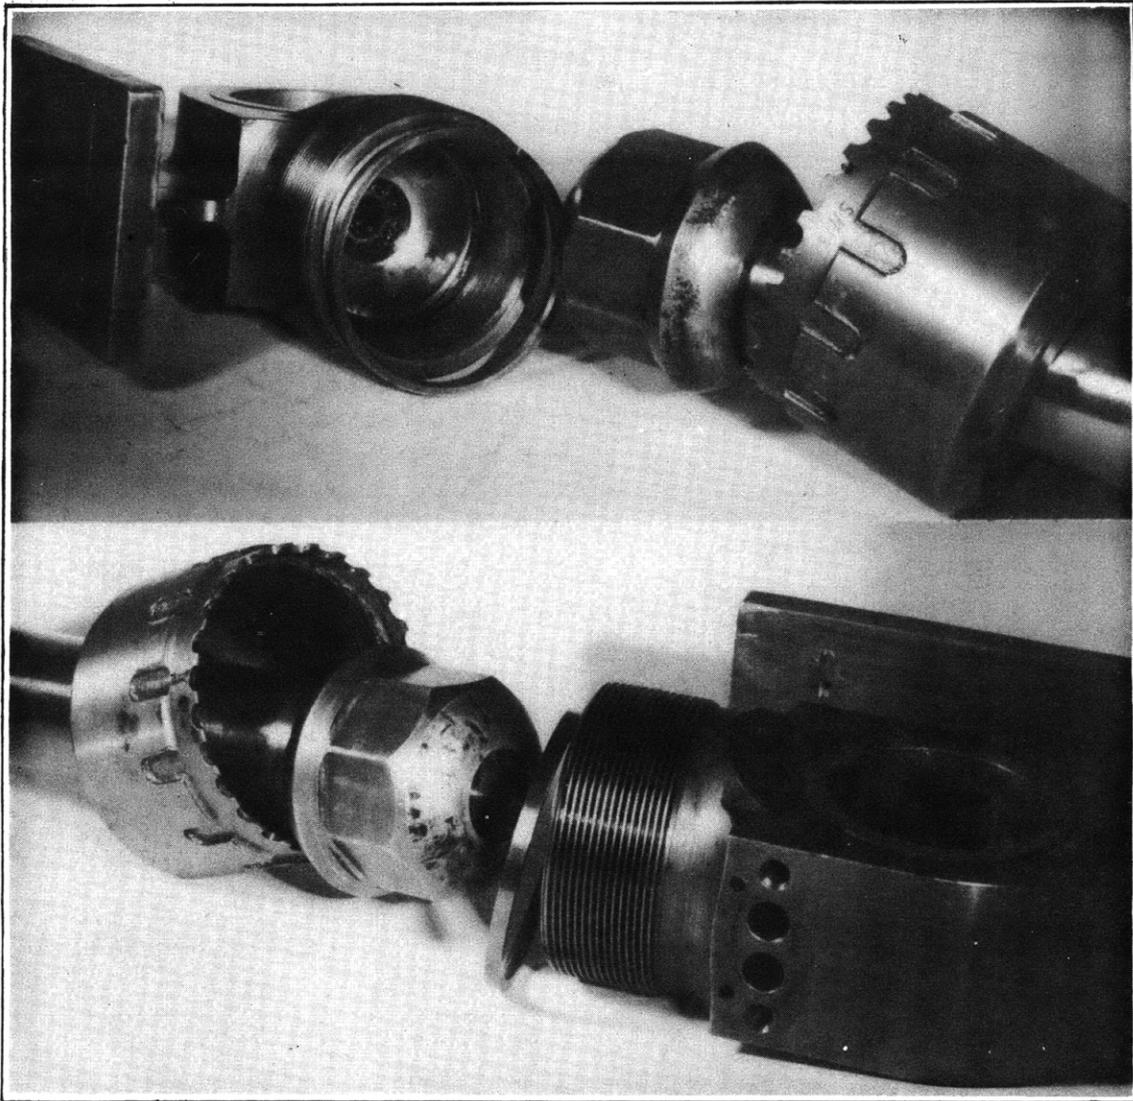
Photographs of Disassembled Crosshead and Crosshead End of Rod showing Spherical Nut and Seat
